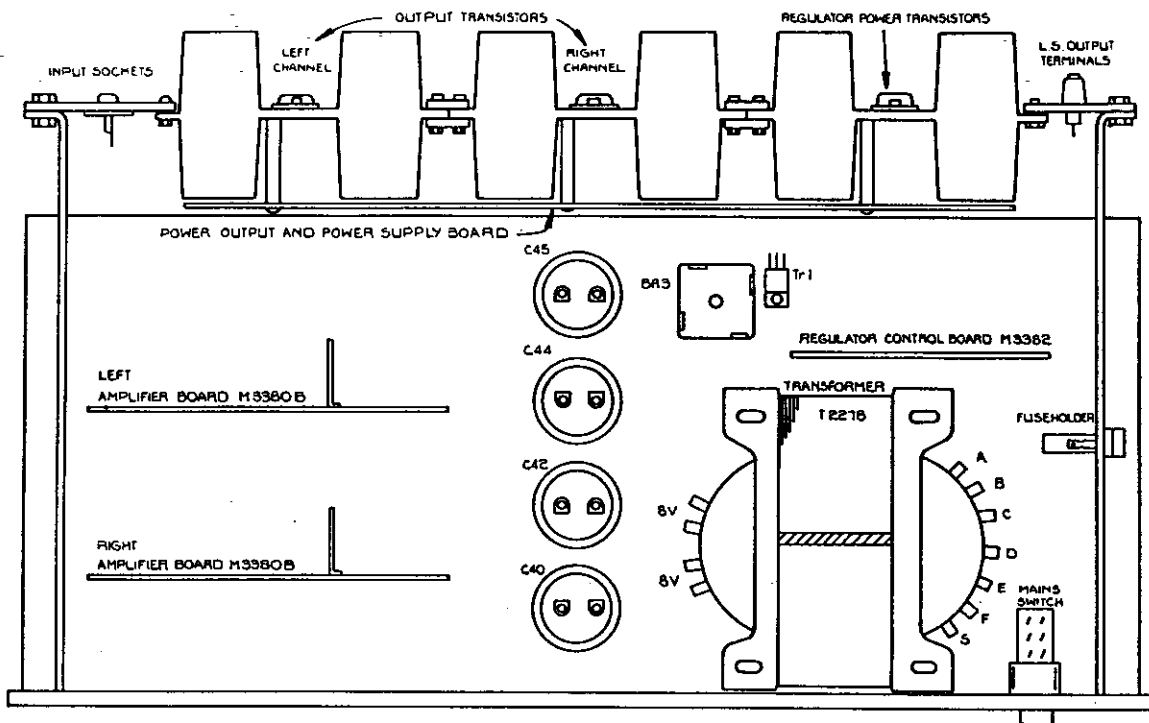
GENERAL ASSEMBLY LAYOUT. ZD100
